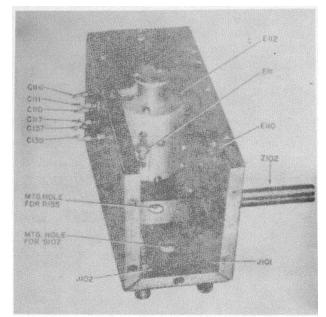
Interior View of Buffer Amplifier with Tube Shelf and CARRIER RANGE Switch (S-107) Removed
